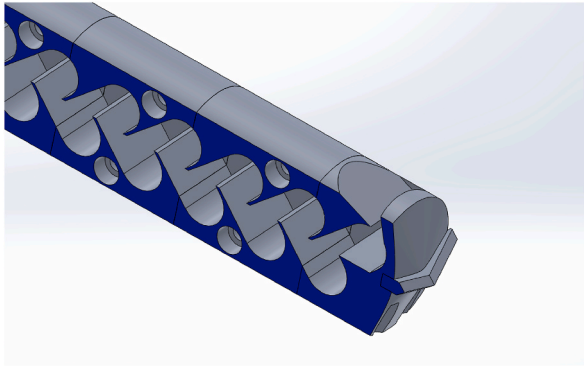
A drillbit containing a pulse-elevator could uplift spoil without gross rotation of the drillbit itself. Please see the Appendix for a sized drawing of this device, which was subsequently manufactured and tested.
